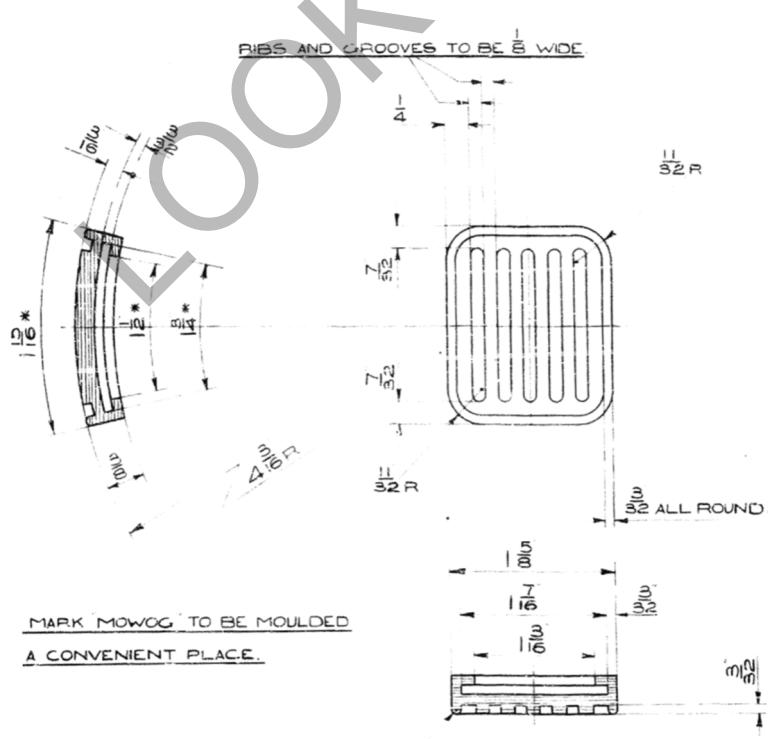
Brake and clutch pedal pad 2A5865.
